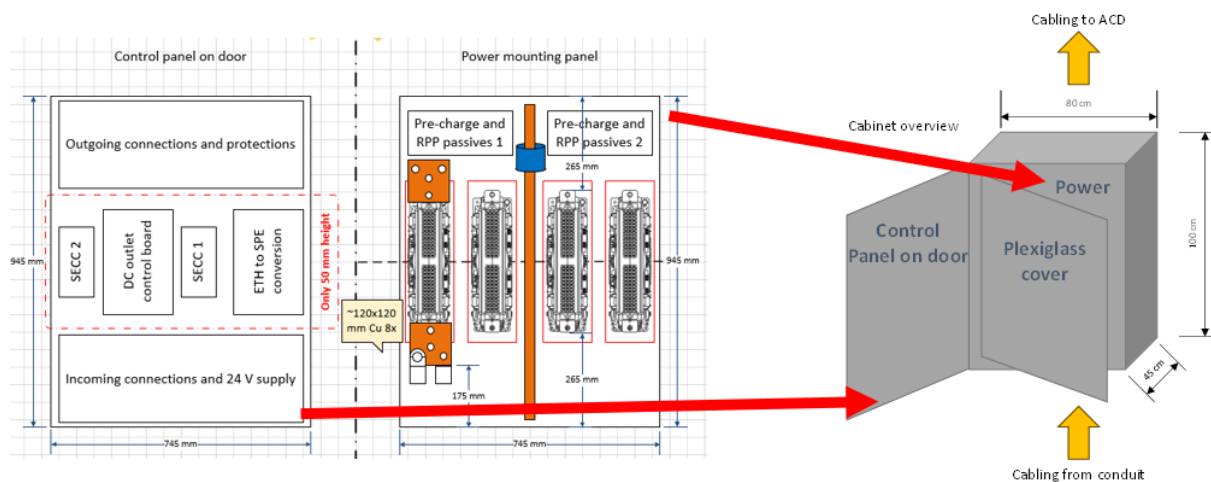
DC outlet dispenser cabinet composition, main components placement and dimensions.
